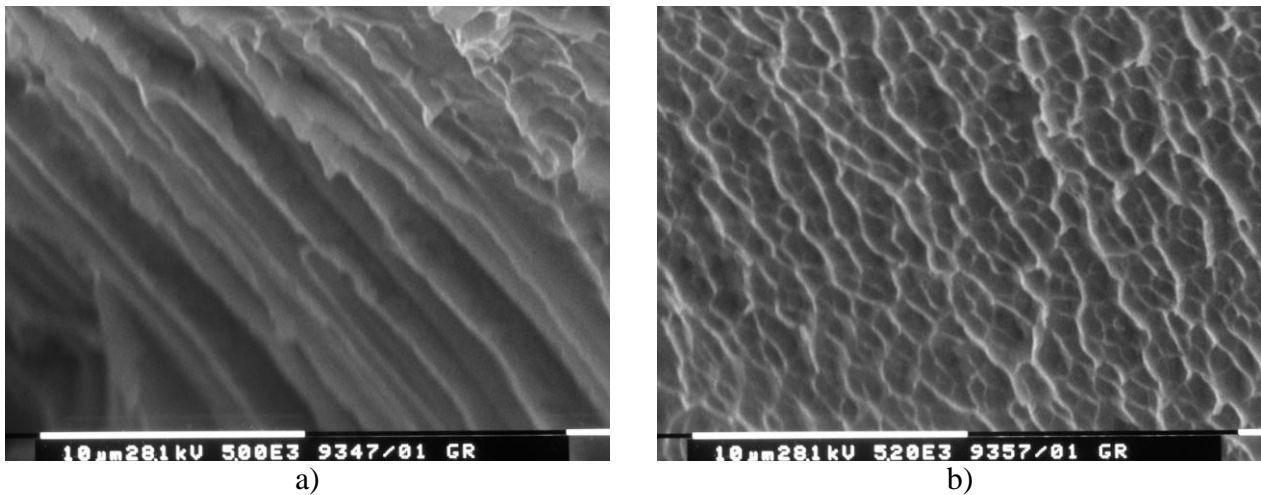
Fracture surface with high deformation: a) morphology of zone A of Fig. 8, b) morphology of zone B of Fig. 8.
